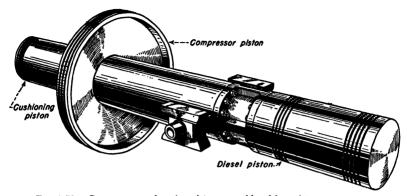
Compressor and engine piston assembly of free-piston compressor.
